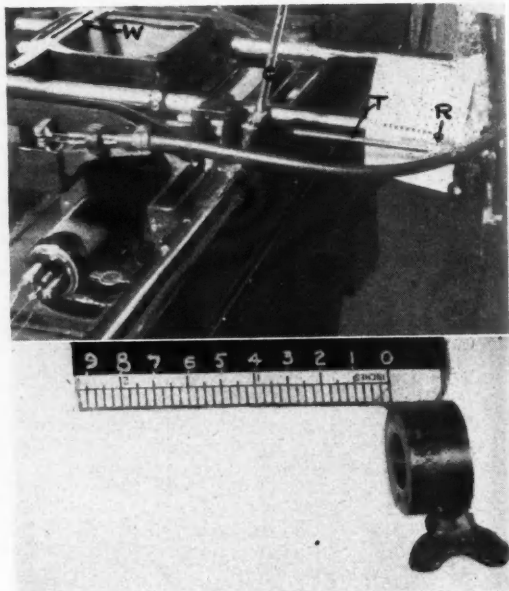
The detail picture below shows a close-up of the rod-marker.
